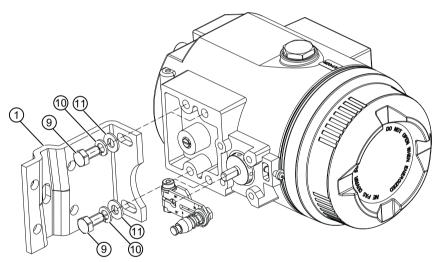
Installation with mounting bracket, flameproof enclosure
